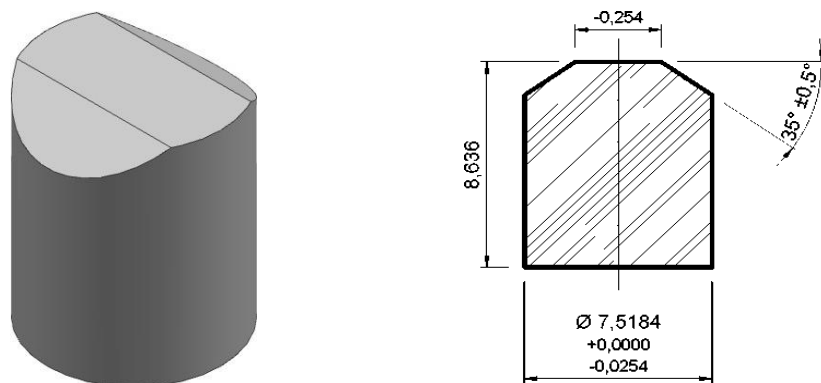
The geometrical details of 0.30 caliber FSP (dimensions in mm).
